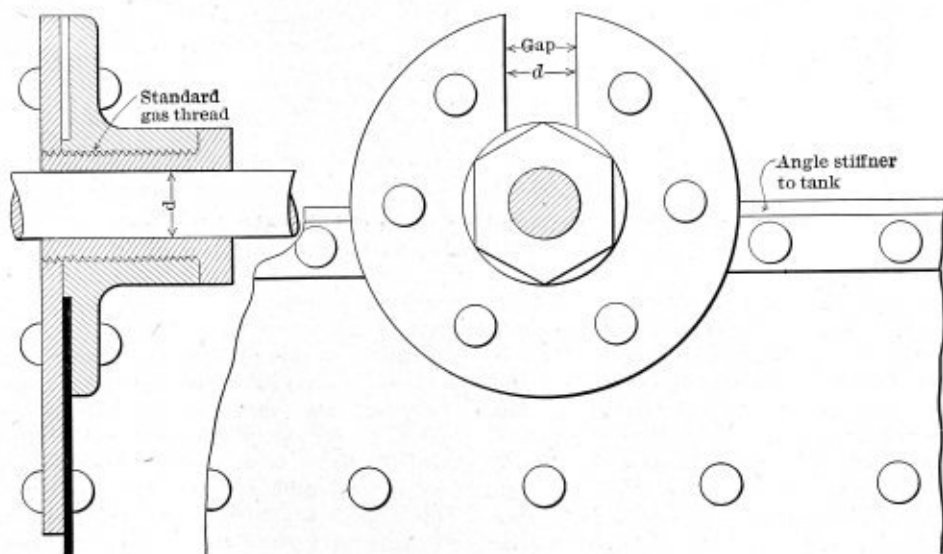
Gap Design for Removal of Spindle Entire with Attachments
